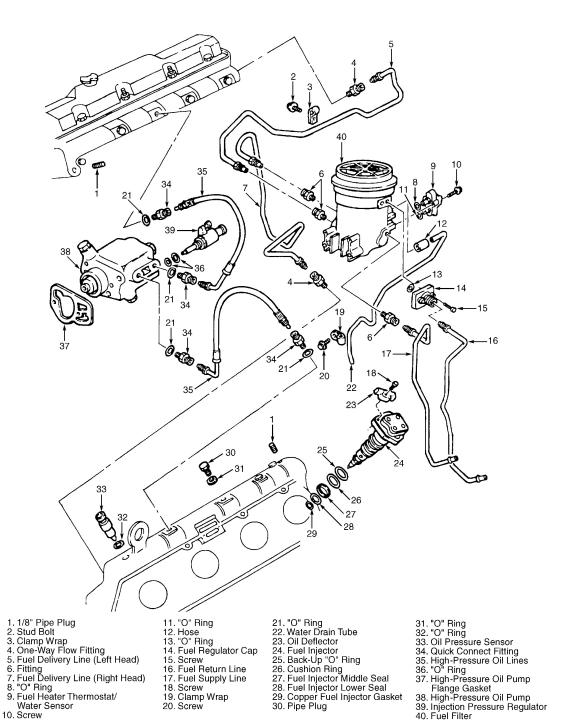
Locating Fuel System Components Courtesy of FORD MOTOR CO.
